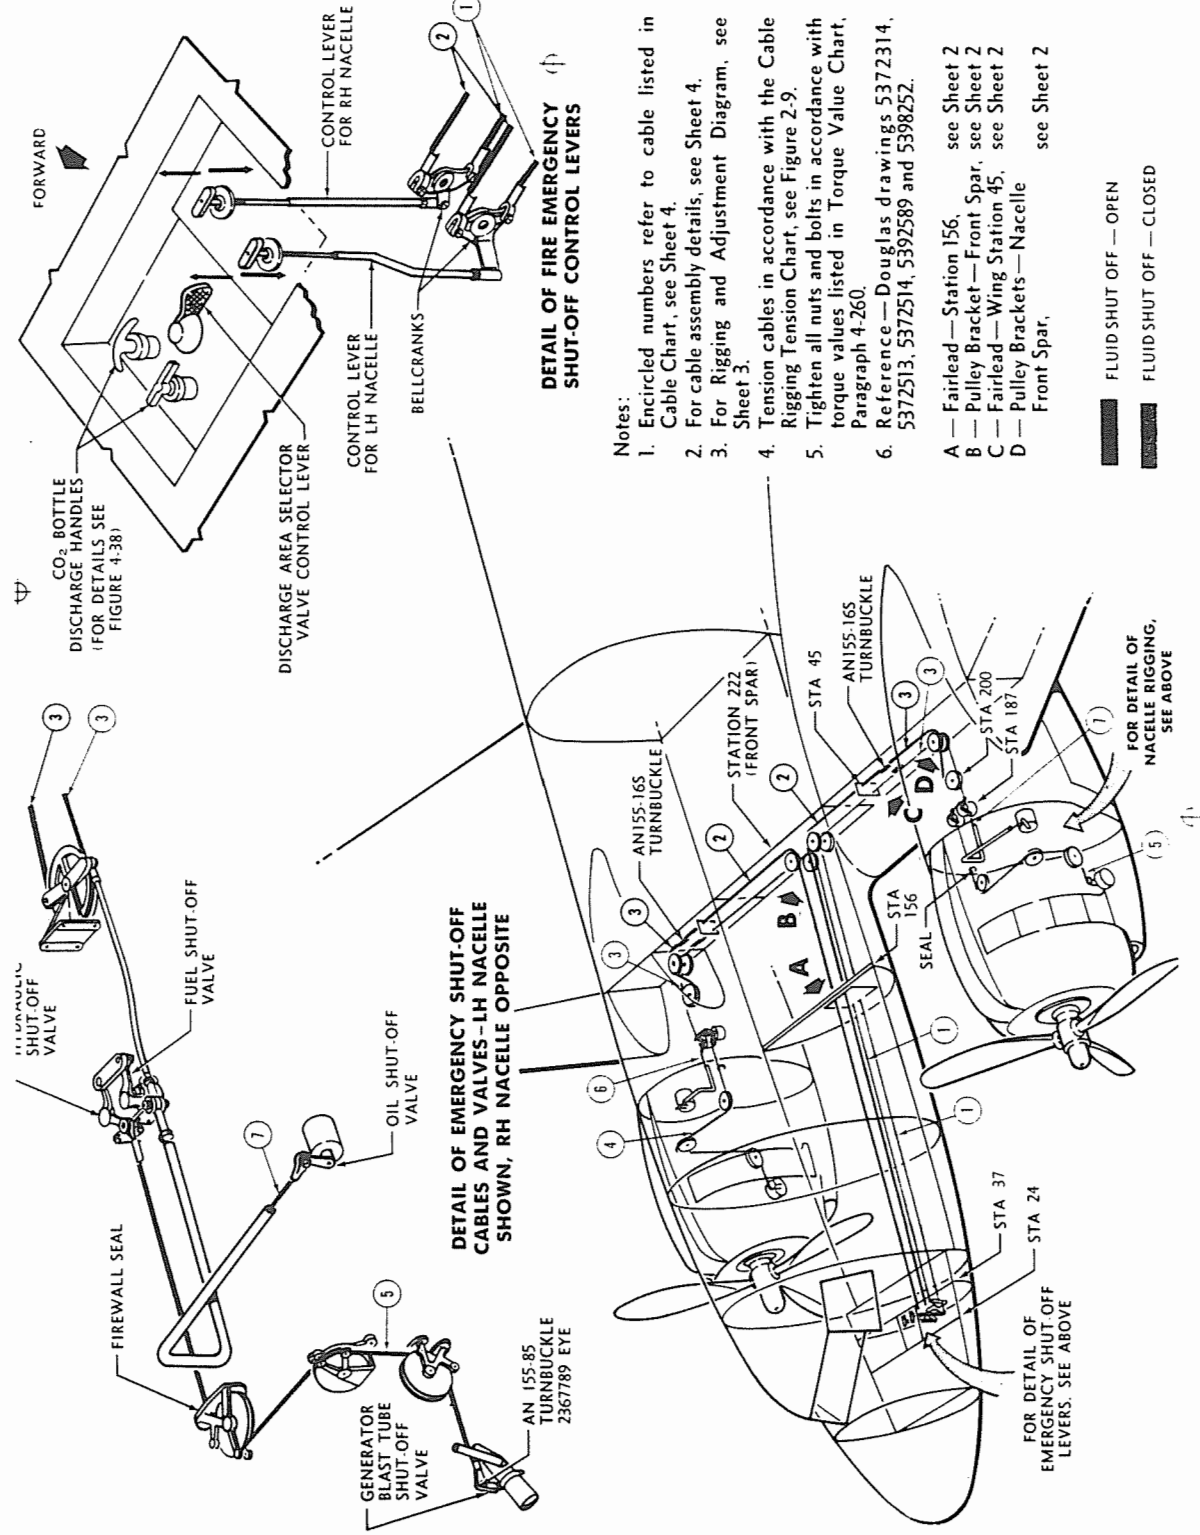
(Sheet 1 of 4 Sheets). Fire Emergency Shutoff Control System — Key Drawing
